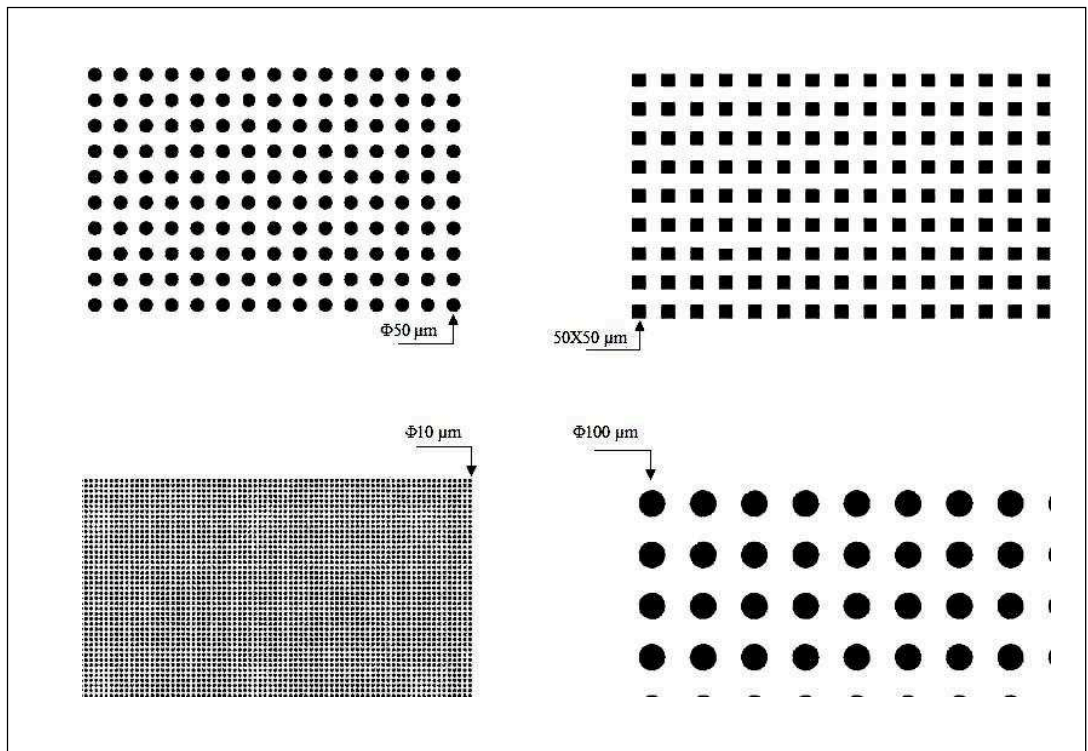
LASICAD drawing of micro bearing surfaces (not to scale and only portions of the textured sections are shown in this enlarged view)
